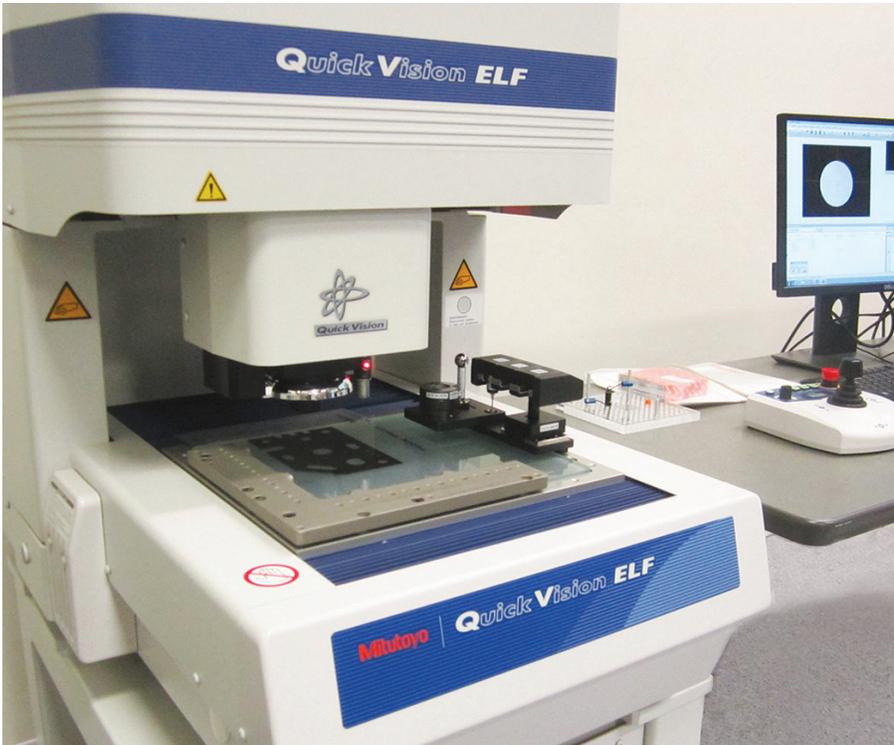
Mitutoyo Elf Coordinate Measurement Machine.
